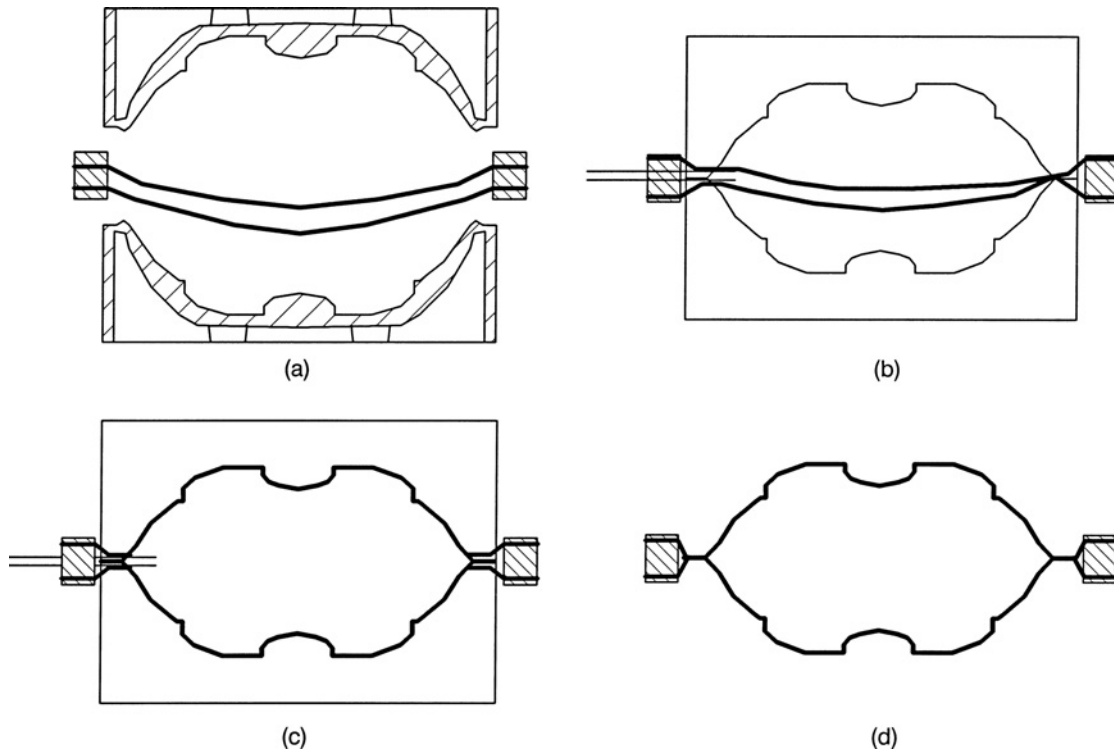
Twin sheet thermoforming process. (a) Heated sheets are placed between the mold halves. (b) The mold is closed, sealing the two sheets at the edges and around an inflation tube. (c) Air pressure is supplied through the tube, causing the sheets to inflate against the mold walls. (d) The mold is opened once the sheets are cooled and the part is removed.
